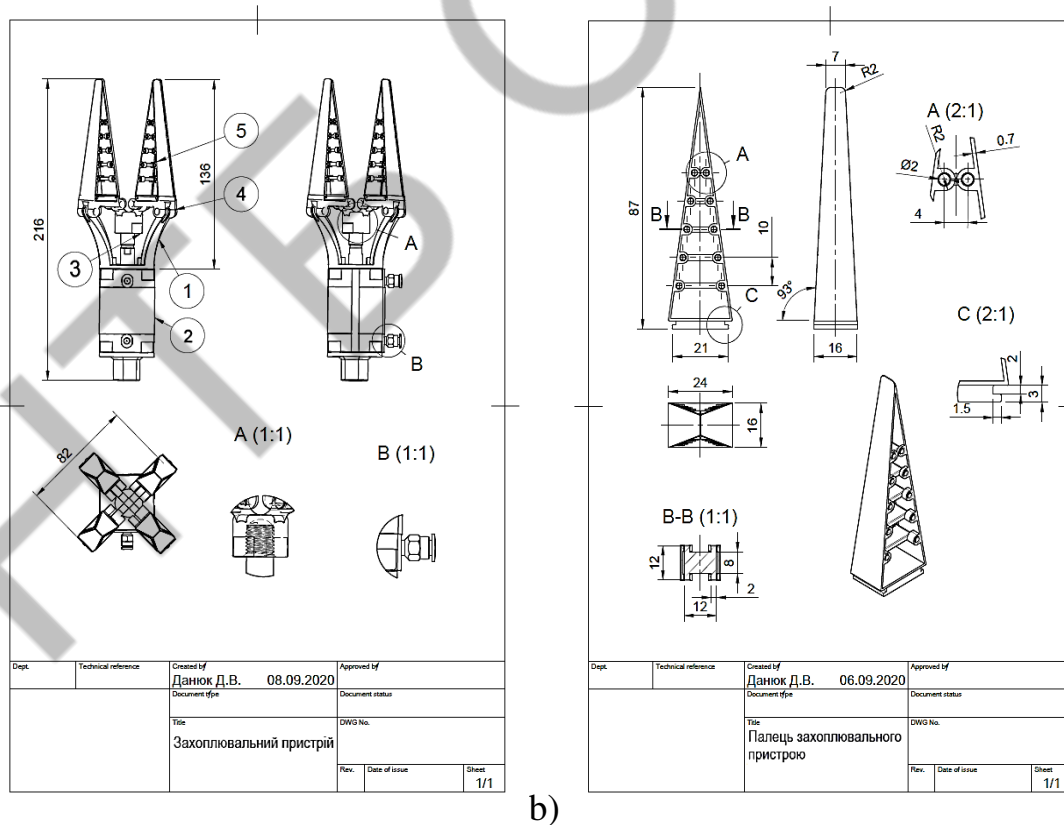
Design of a four-finger gripping device with flexible fingers: a - working drawing of the general view; b - working drawing of a finger of the gripping device
